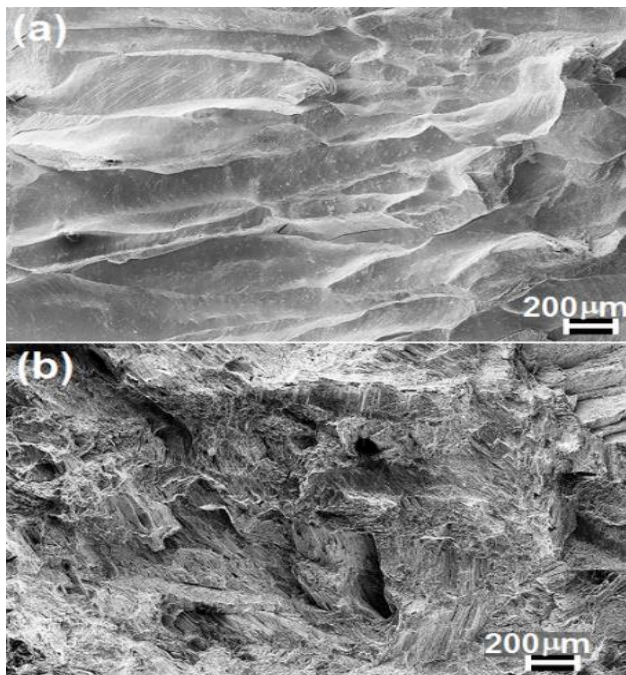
Fracture surfaces of the Co-20Cr after tensile testing in (a) as-cast condition and (b) after heat treating.
